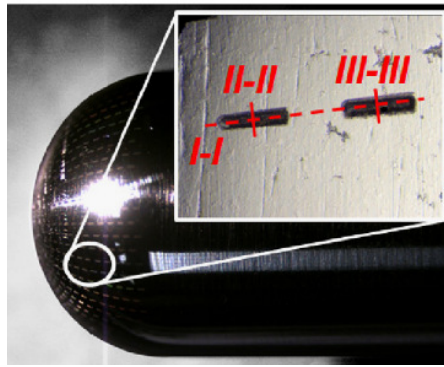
Laser texturized surface tool head. Xu *et al.*, 2013
